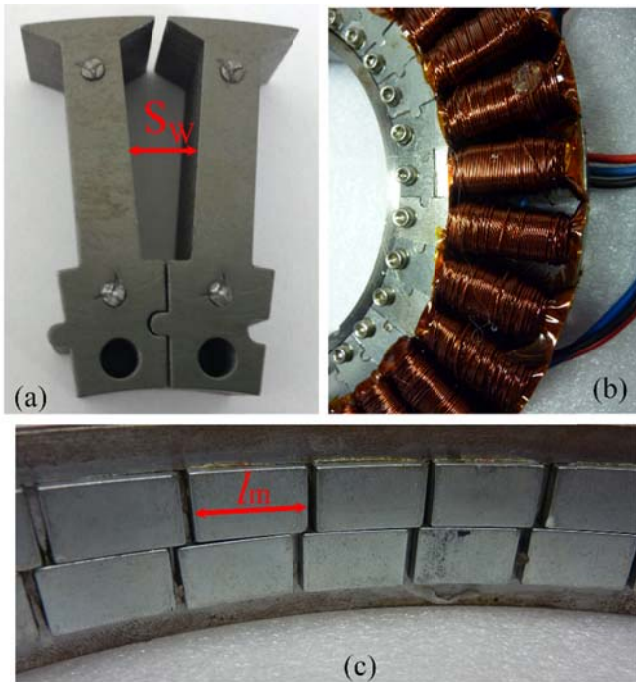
Manufactured optimized generator, (a) the tooth, (b) mounted stator core, and (c) permanent magnets on the rotor
